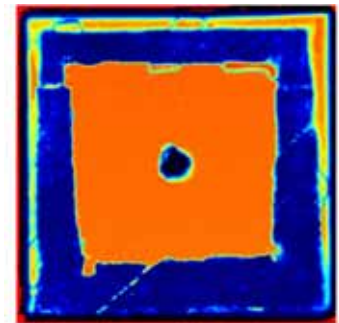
Ultrasonic image of 250 μ m Al sheet bonded 5cm by 5cm specimen showing contact defects (hairline cracks)
